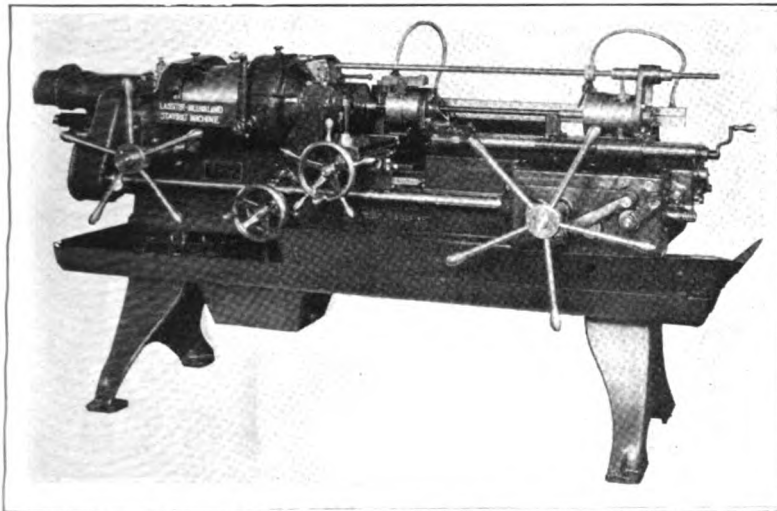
MODEL B LASSITER-MILLHOLLAND STAYBOLT MACHINE
